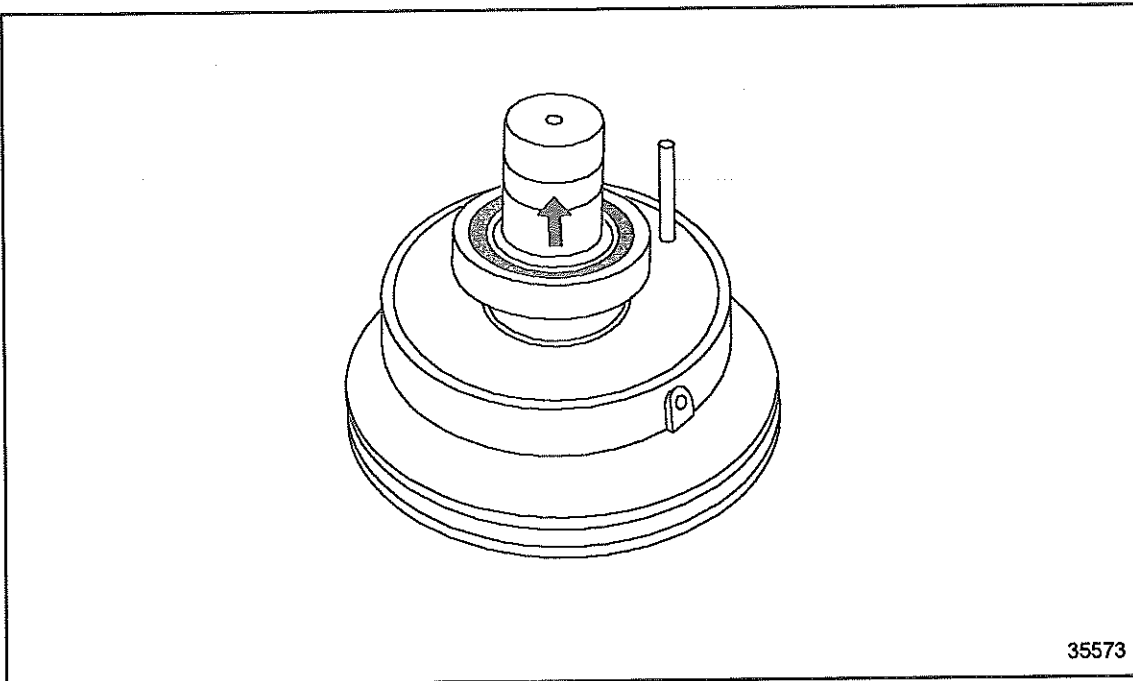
Removing Metal Ring from Groove on Back of Impeller
